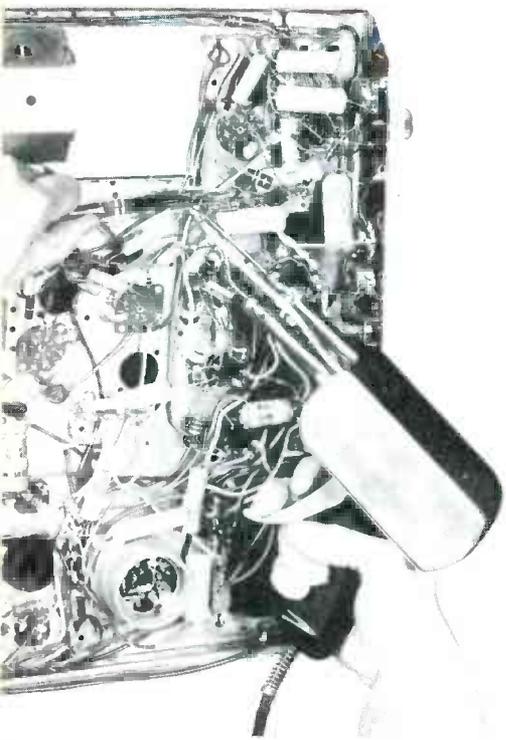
Solder-Matic gun attachment, a third hand for the technician.
